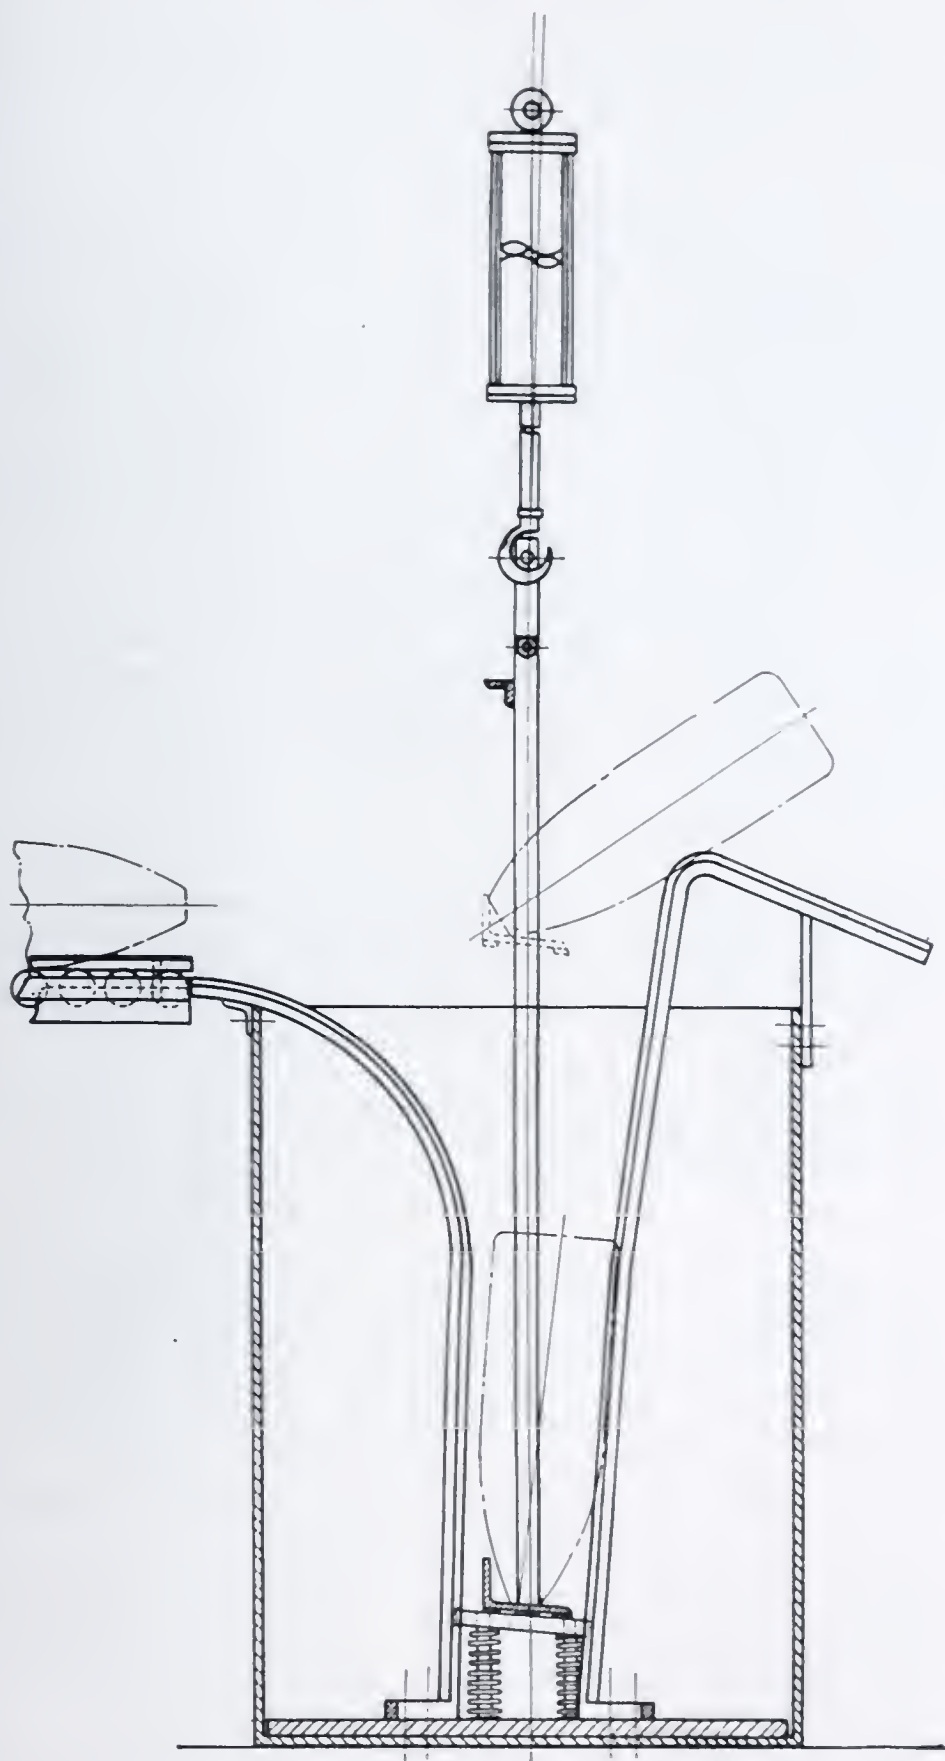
Arrangement for Oil Quenching Eight-Inch Shell.
